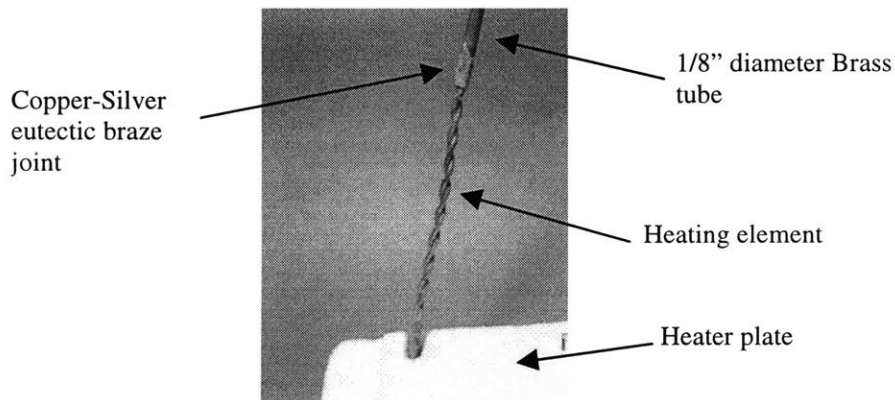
Picture showing the braze joint between the heating element and the Brass tube. Once outside the heater plate, the heating element is double twisted to reduce resistive heating. This keeps the braze joint cool.
